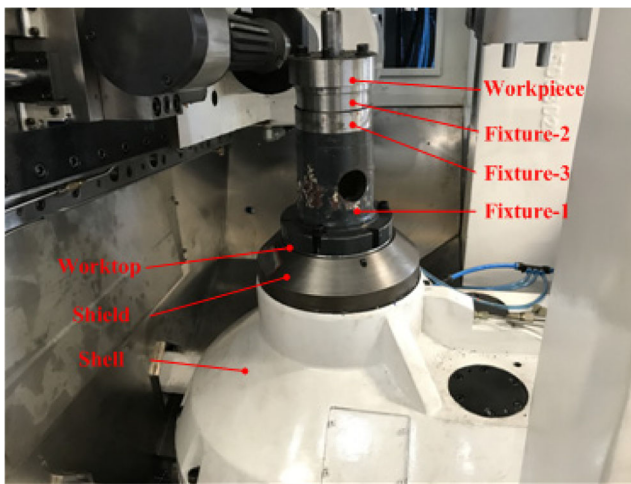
The structure of the worktable assembly of the dry hobbing machine
